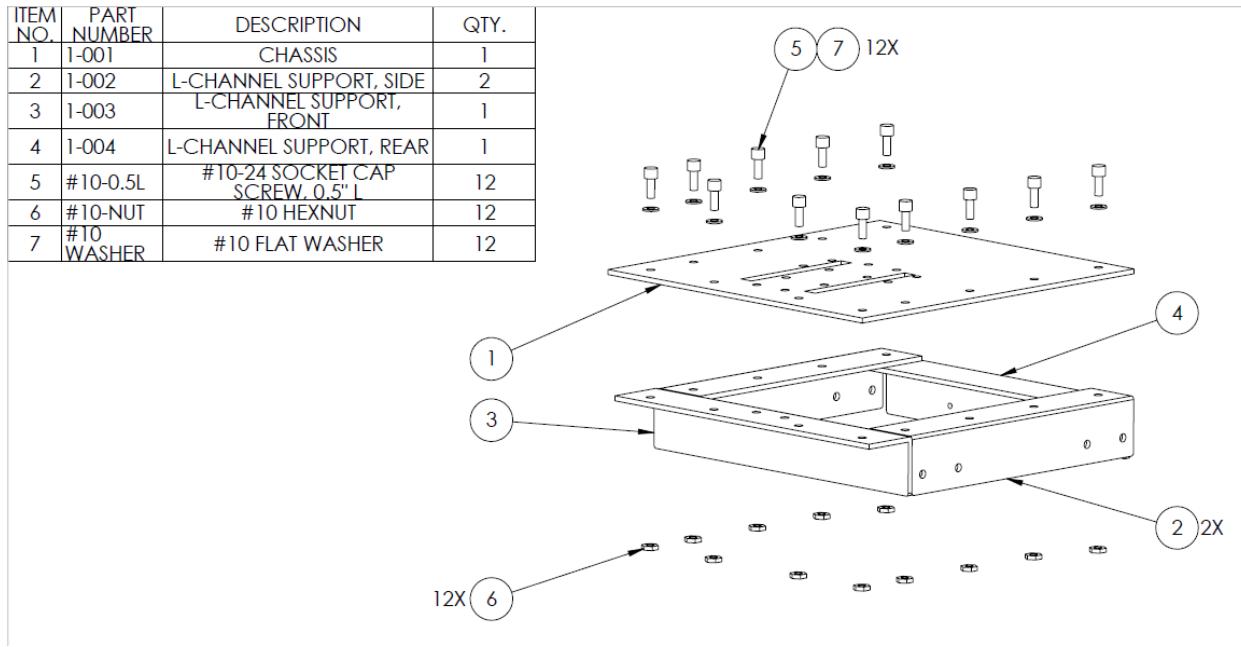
Vehicle Support Structure Engineering Drawing, Exploded View
